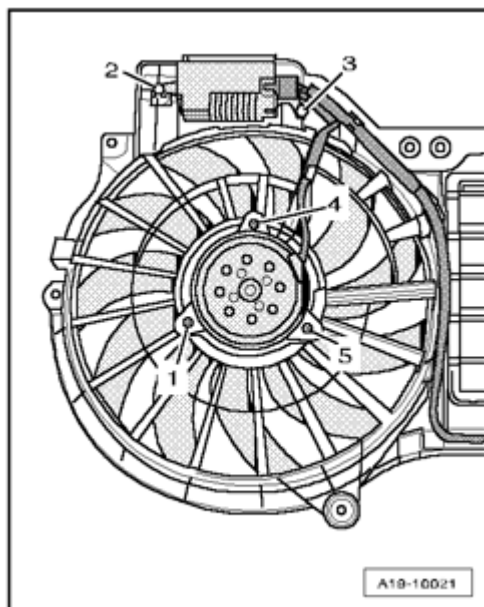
Removing Bolts & Coolant Fan With Control Module
